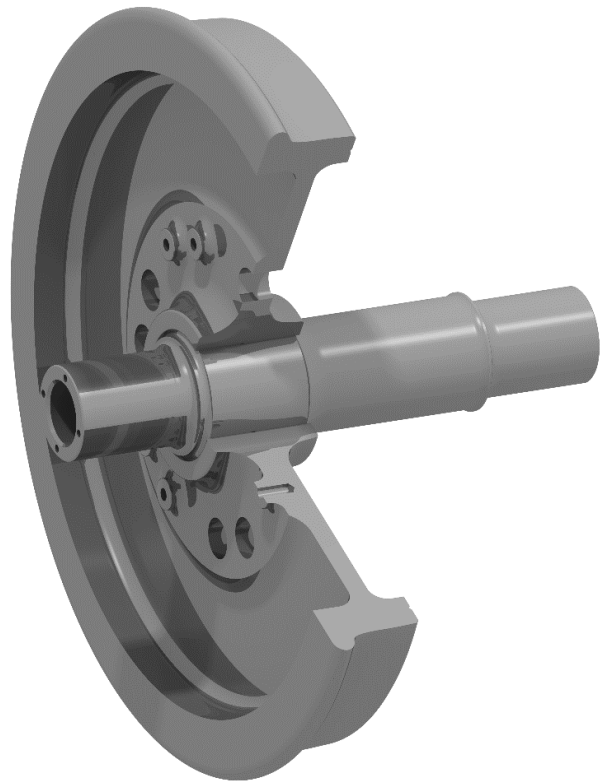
Layout of the "wheel unit" (wheel/shaft assembly)
